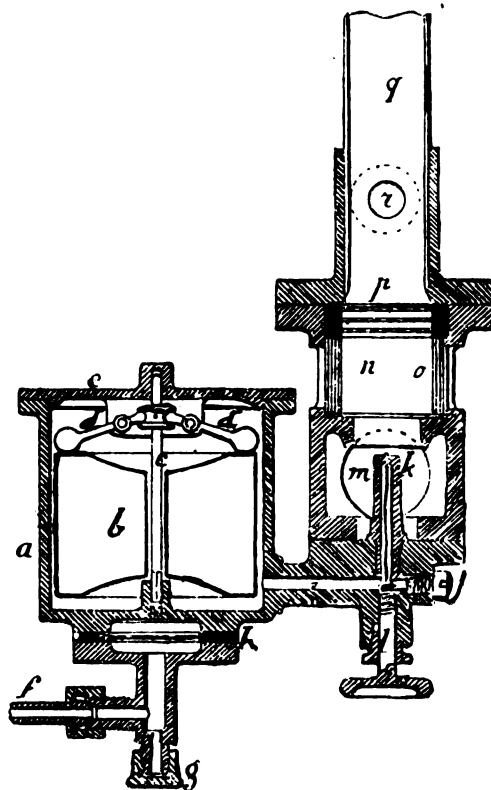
SECTION OF ELGIN CARBURETTOR.
